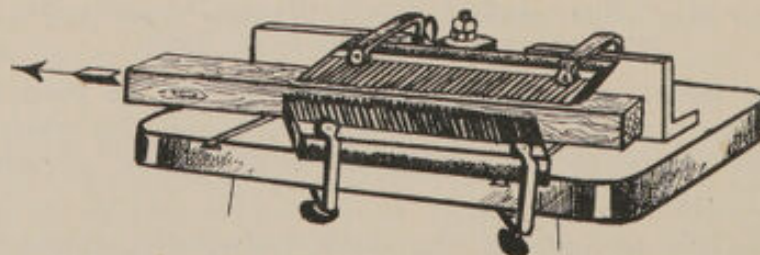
“Home-made” Wooden Comb Spring Guard for Spindle Moulder.
